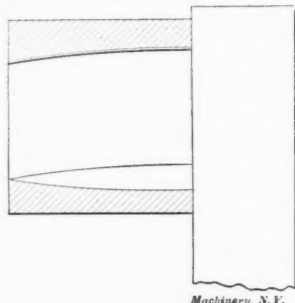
Section showing the Bending of a Crankpin and Consequent Unequal Wear of the Box.
